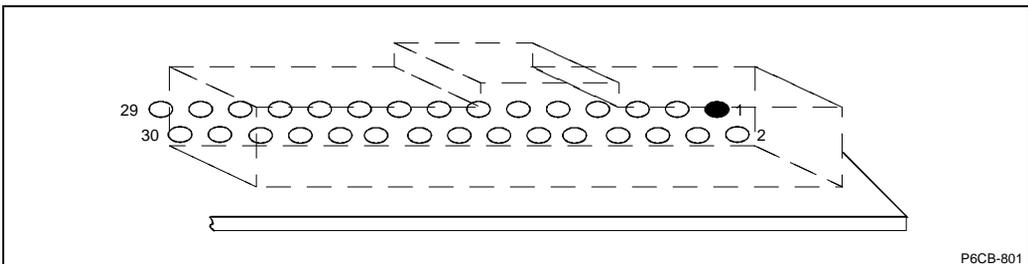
Hole Positioning for Connector on Thermal Plate Side of Circuit Board
